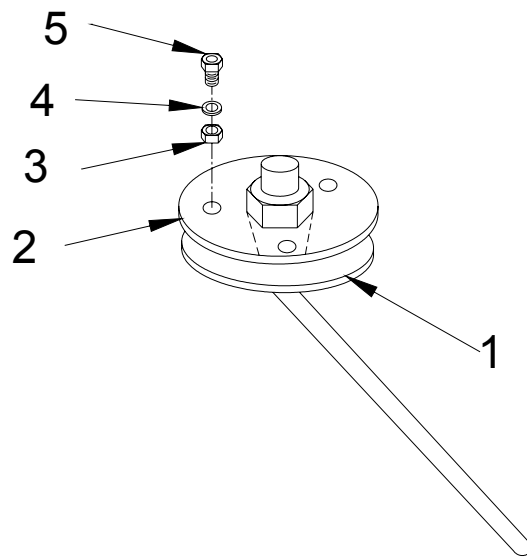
FUEL SYSTEM ASSEMBLY/FUEL TANK/FUEL-LEVEL ASSEMBLY
